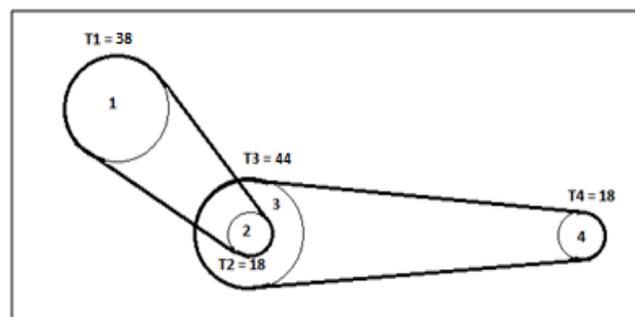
EMT preferred drive arrangement of 2 sets of 44T & 18T sprockets, 32T & 18T sprockets.
